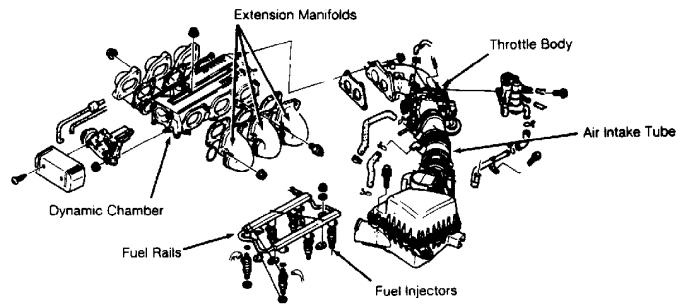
View of Upper Intake Manifold Components & Fuel Rail (MPV 3.0L Shown; 929 SOHC Similar)
